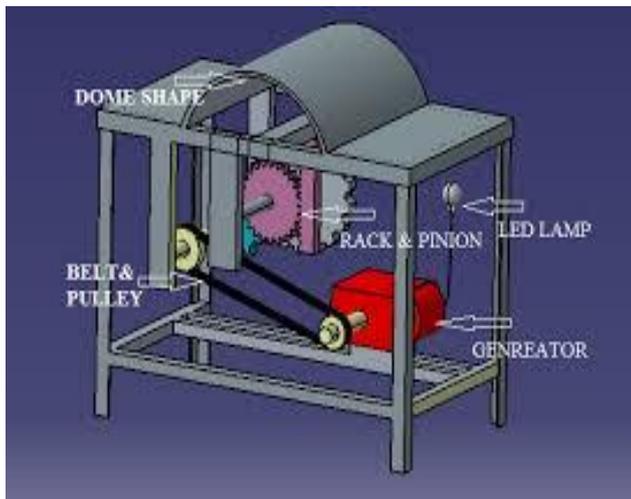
Setup of Rack and Pinion Mechanism using Belt and Pulley Arrangement
